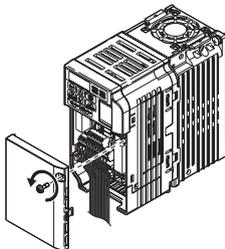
Remove the Front Cover on an IP20/Open-Chassis Drive
